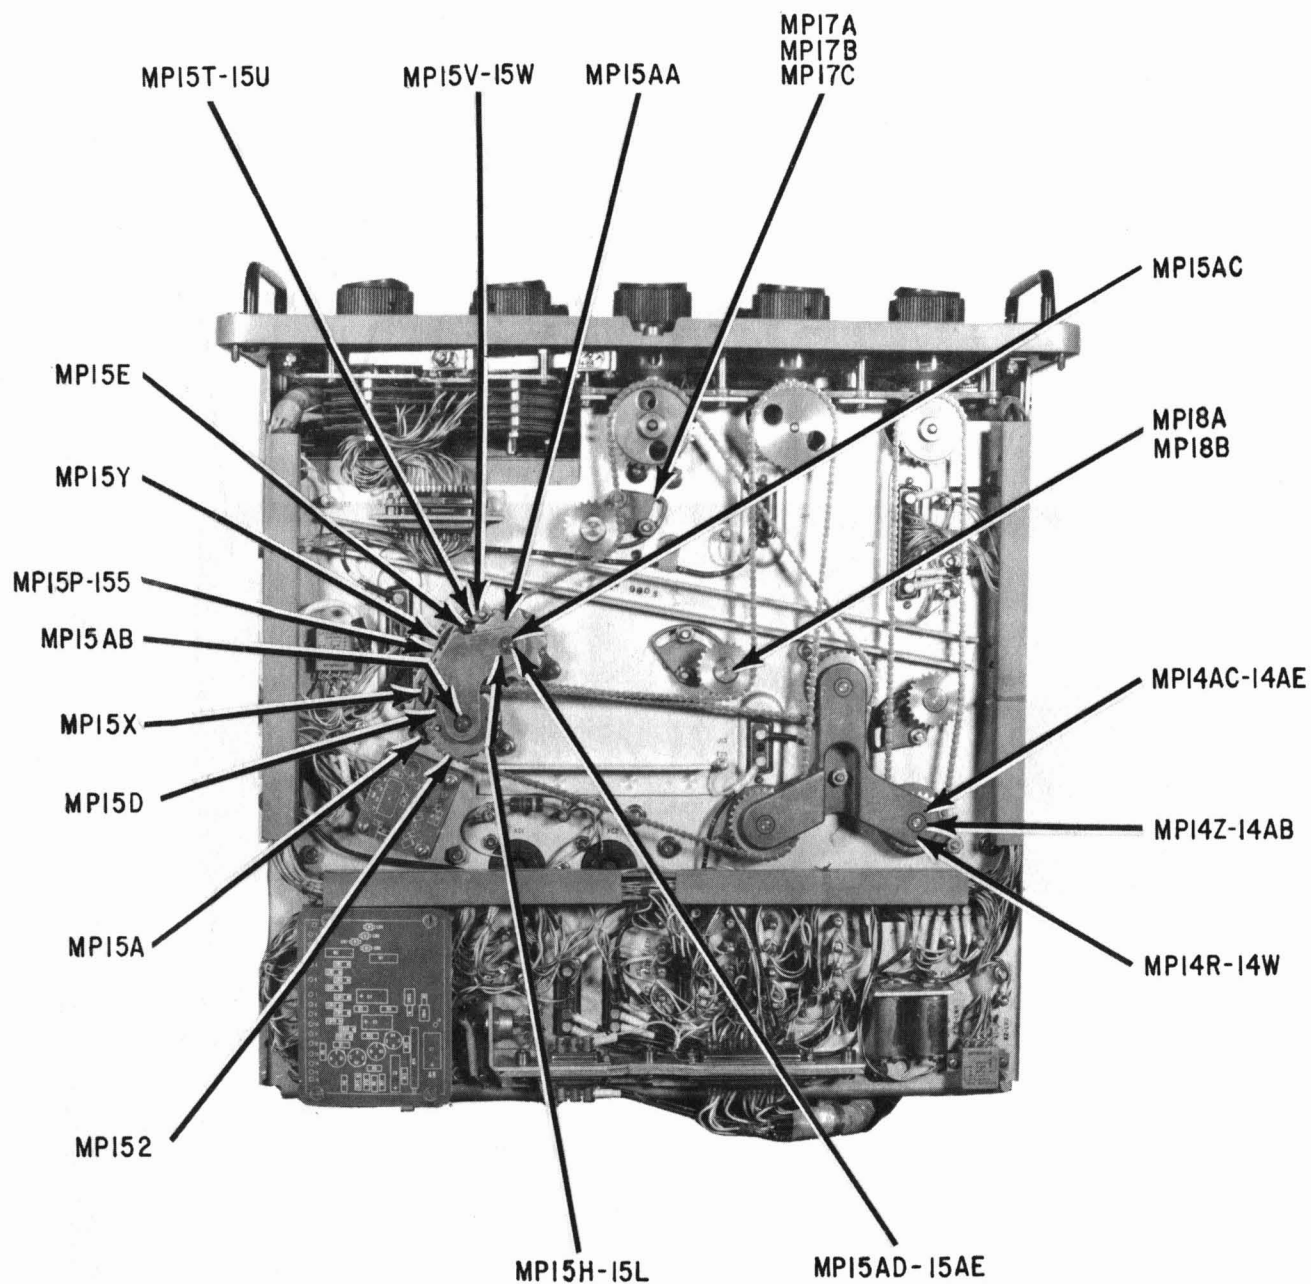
R-1051/URR Chassis Main Frame, Bottom View, Component Location
